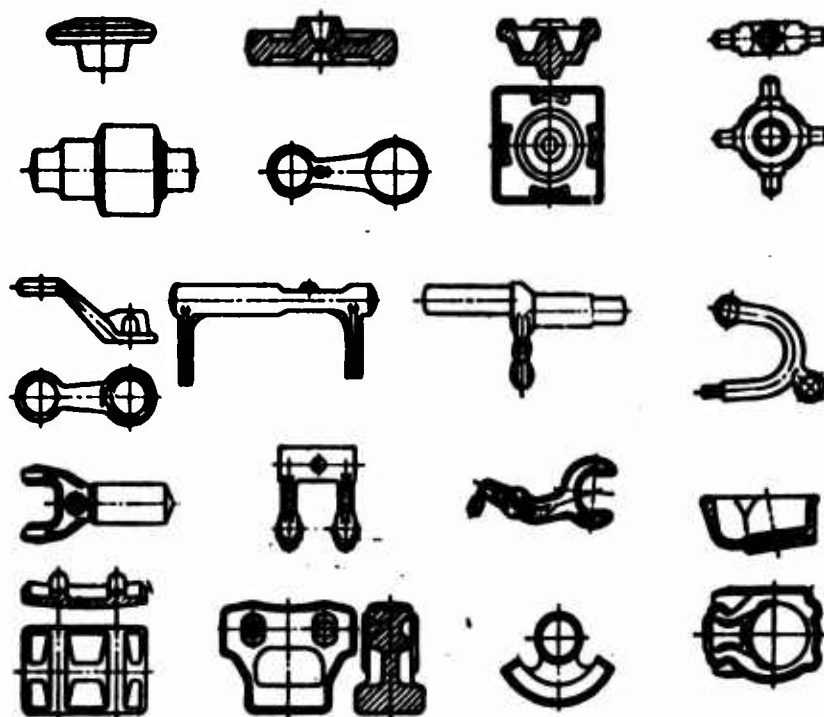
Examples of some shapes of forgings stamped in open dies.
